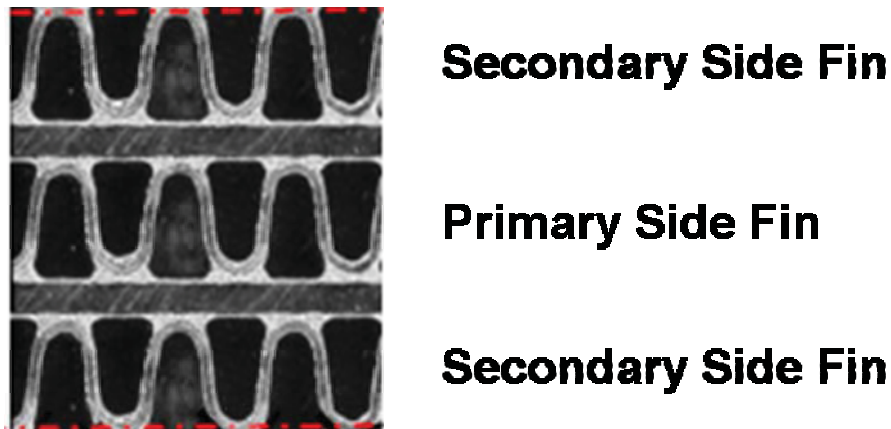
Photograph of Example Plate-Fin Heat Exchanger Cross-Section
